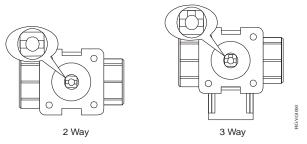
Positioning the Valve Stem -Spring Return Port A (Coil) Open
